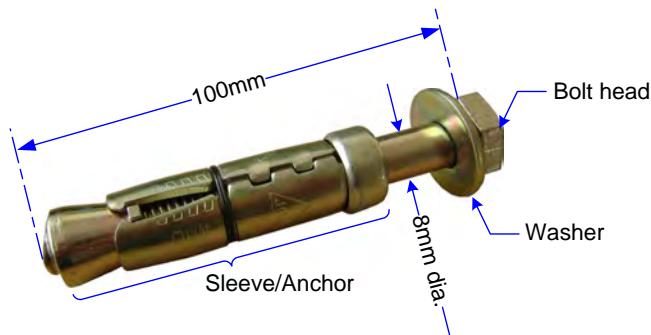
M8 Rawlbolt – recommended for wall mount.
